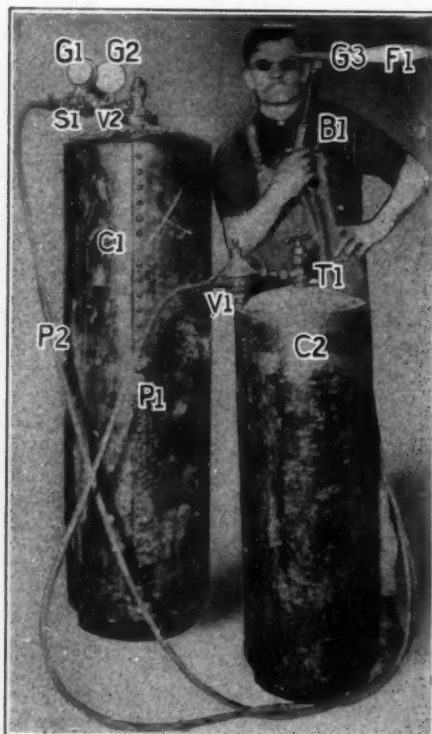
Welding equipment, showing oxygen and acetylene tanks, gauges, valves, etc.
